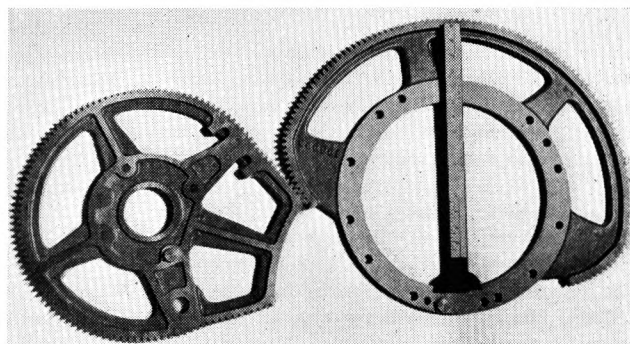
ROLLCURVE GEARS WITH CUSPS ELIMINATED WHICH PERMITTED THE GEARS TO BE CUT WITH A FELLOWS CUTTER
